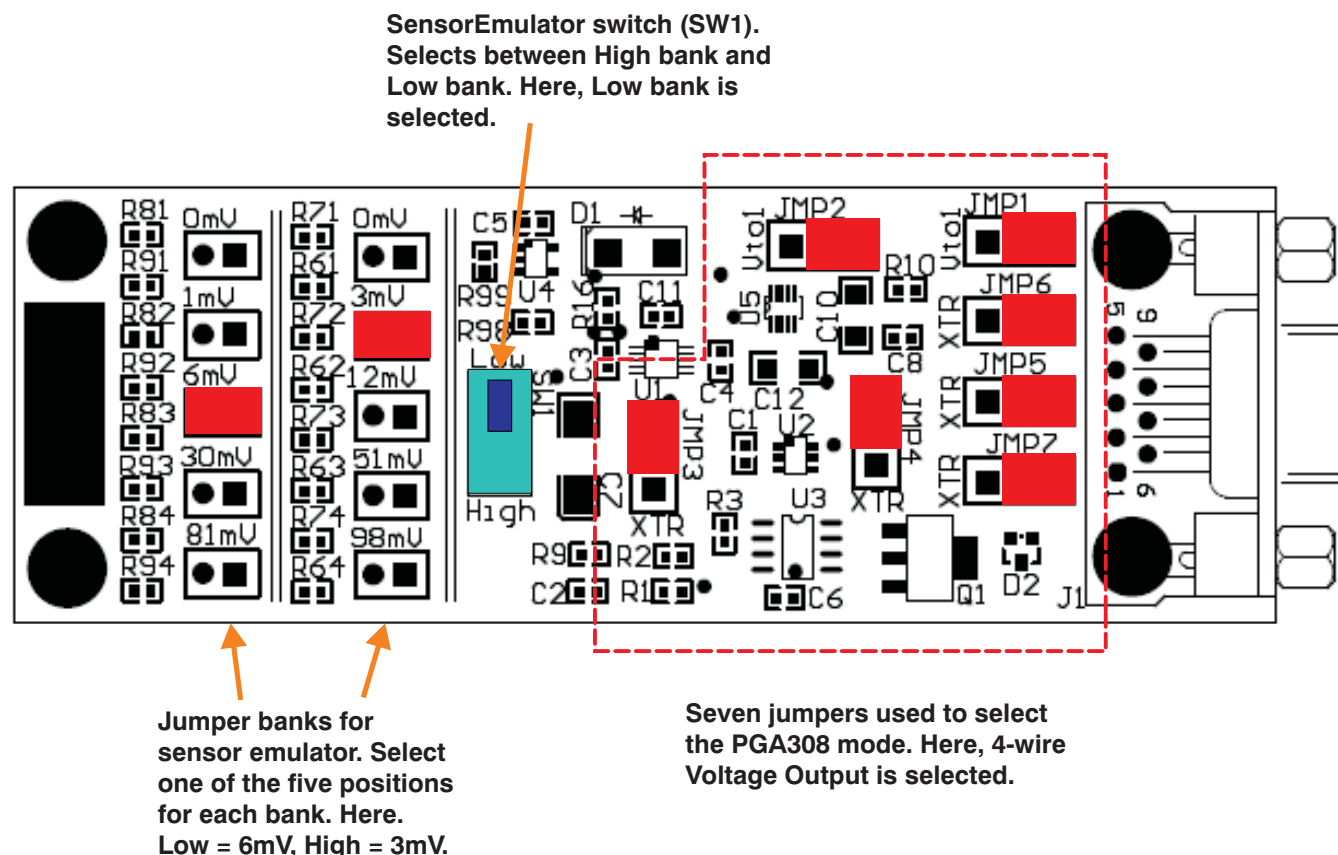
Jumpers on Multi-Cal-Test PCA Card
